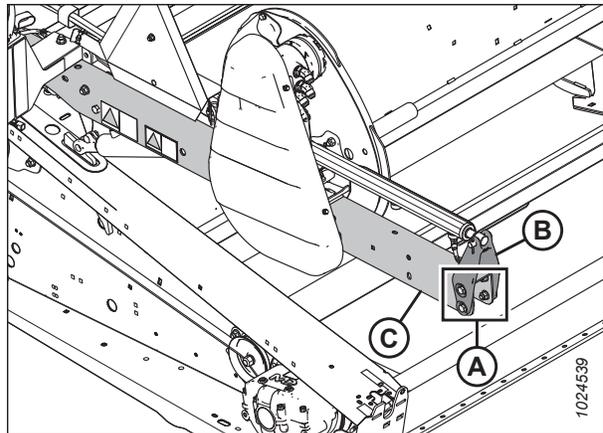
Right Reel Arm Cylinder in Forward Position
